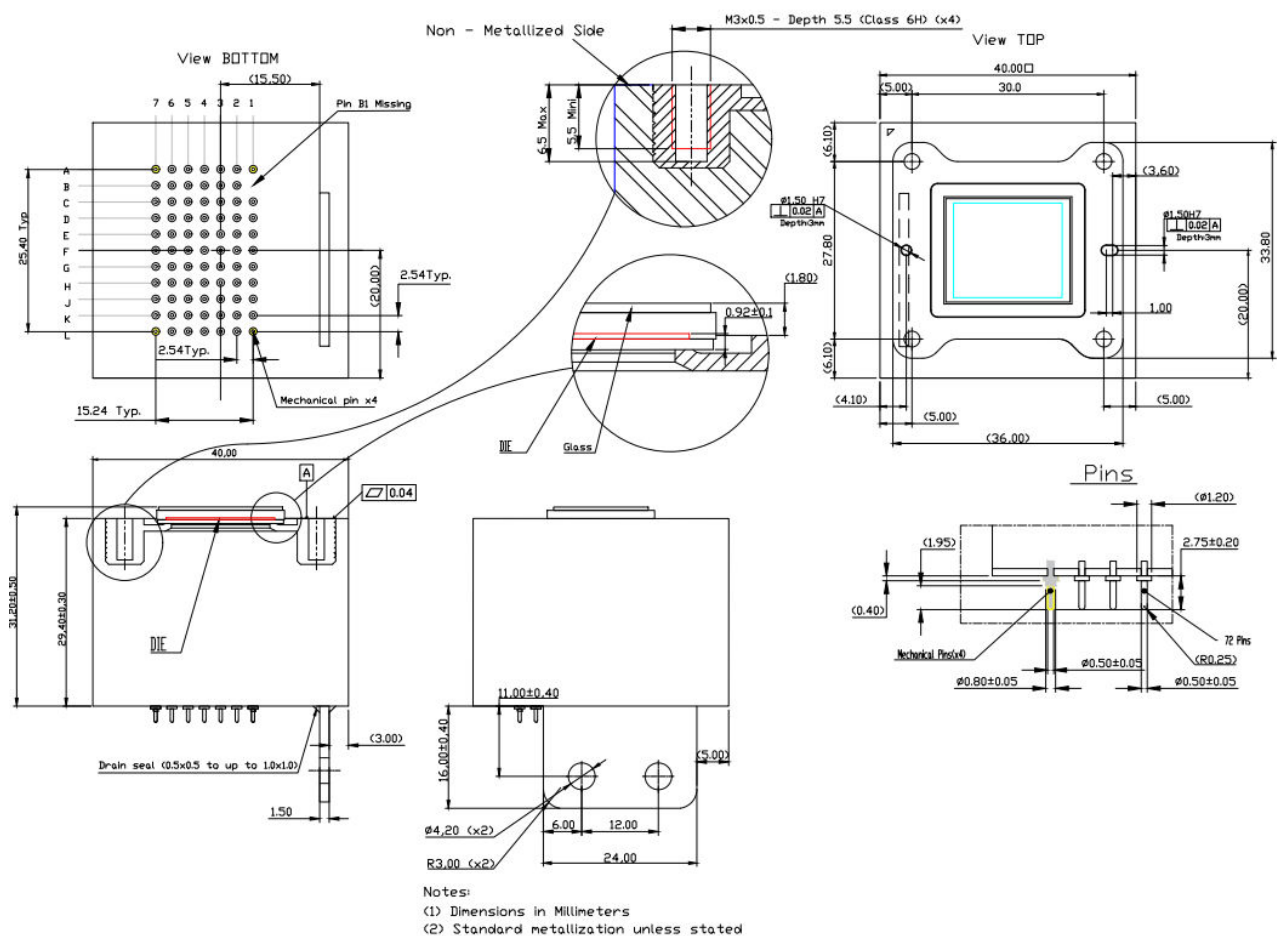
CASPEX 1.3M SWIR Camera Head Mechanical Drawing
